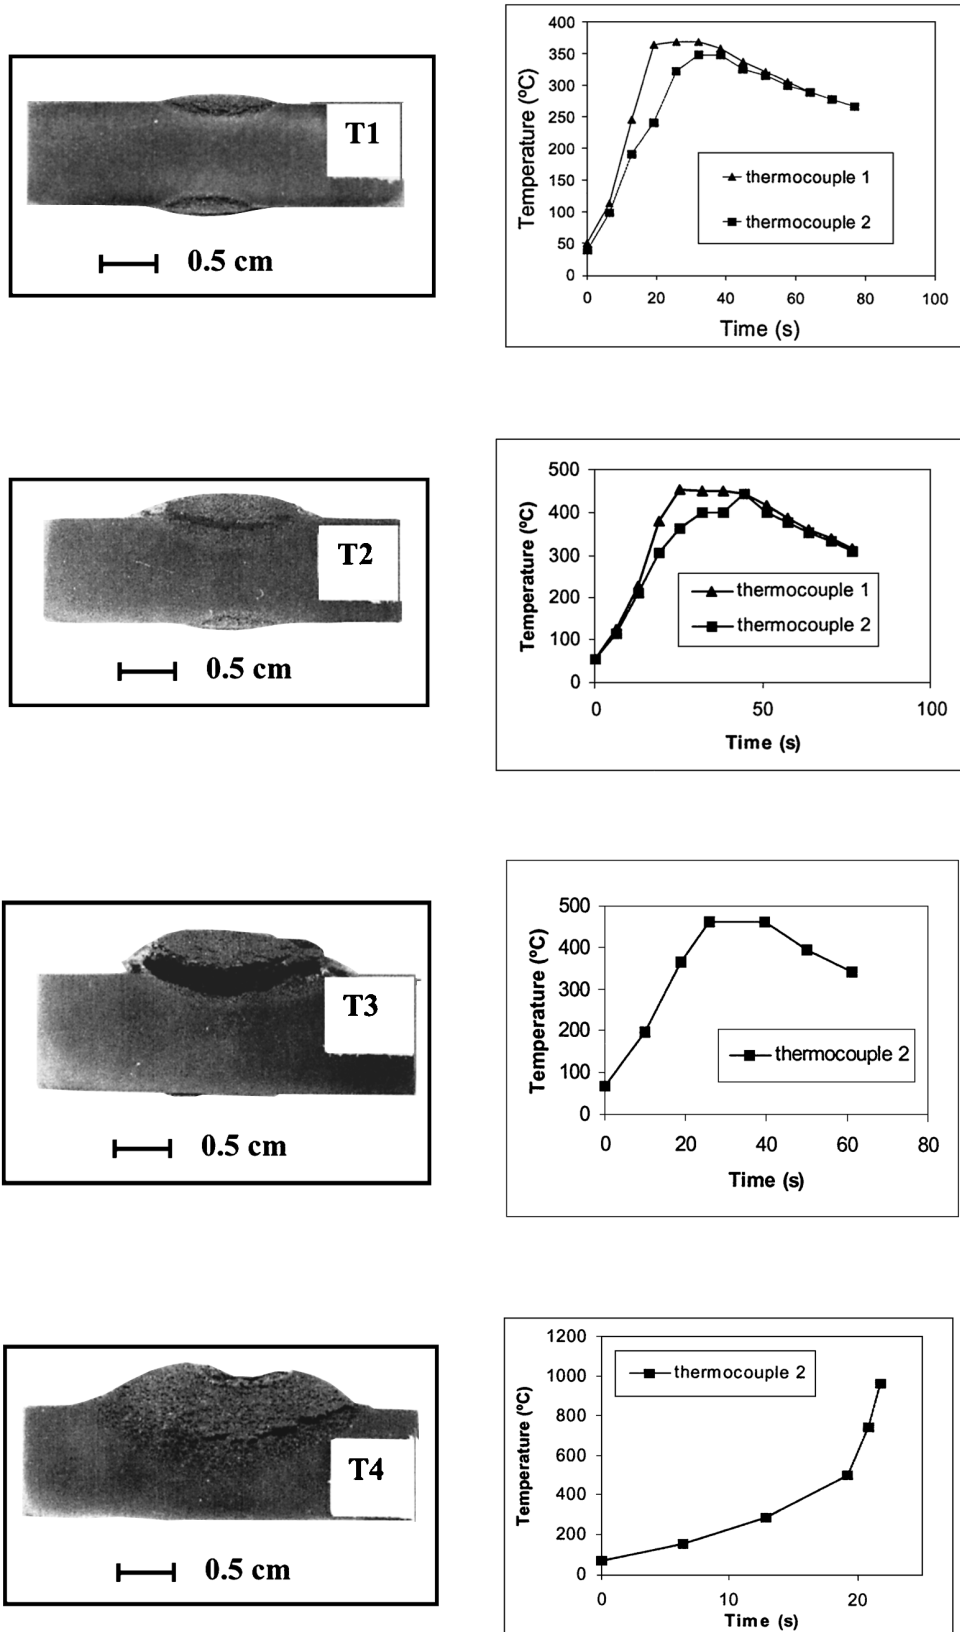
Macrographs of the TIG welding tests applied on the composite sheets. Temperature cycles for each weld (measured with thermocouples located at 8 and 13 mm from the weld axis).
